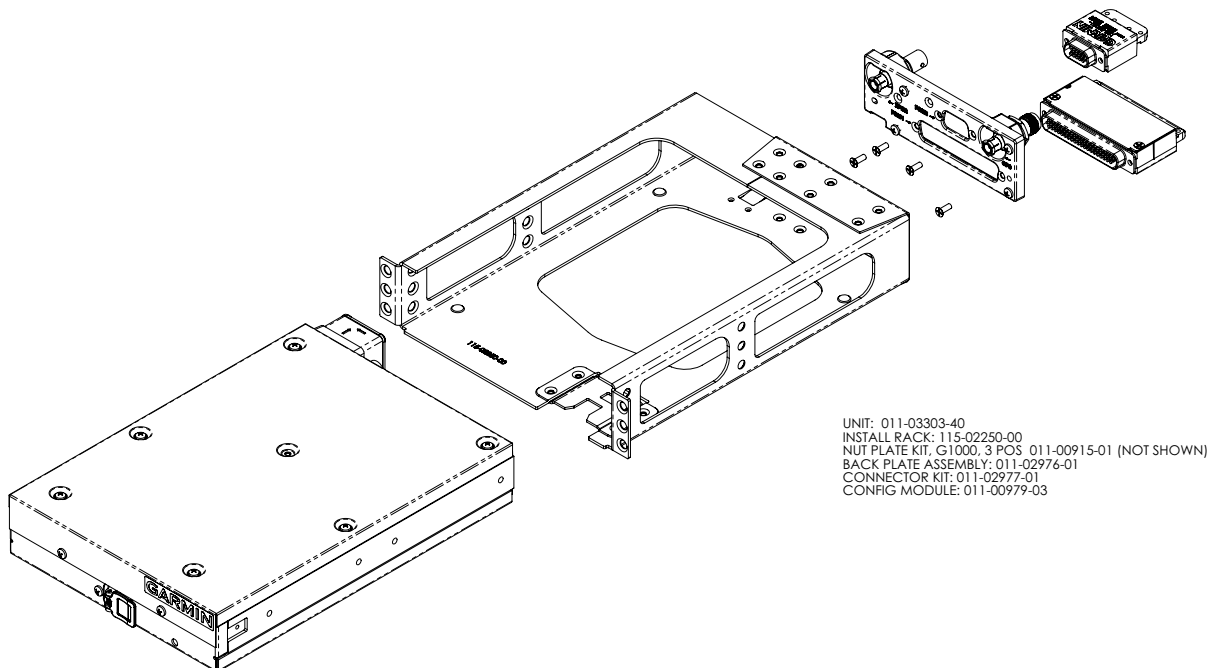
GTX 3X5R G1000 Mounting Rack/Connector Assembly
